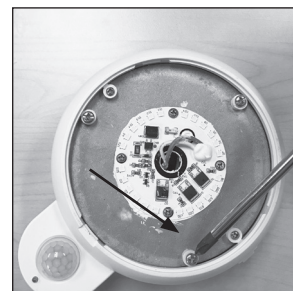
C: Remove the Screws that hold the Mounting Base Plate to the Luminaire
